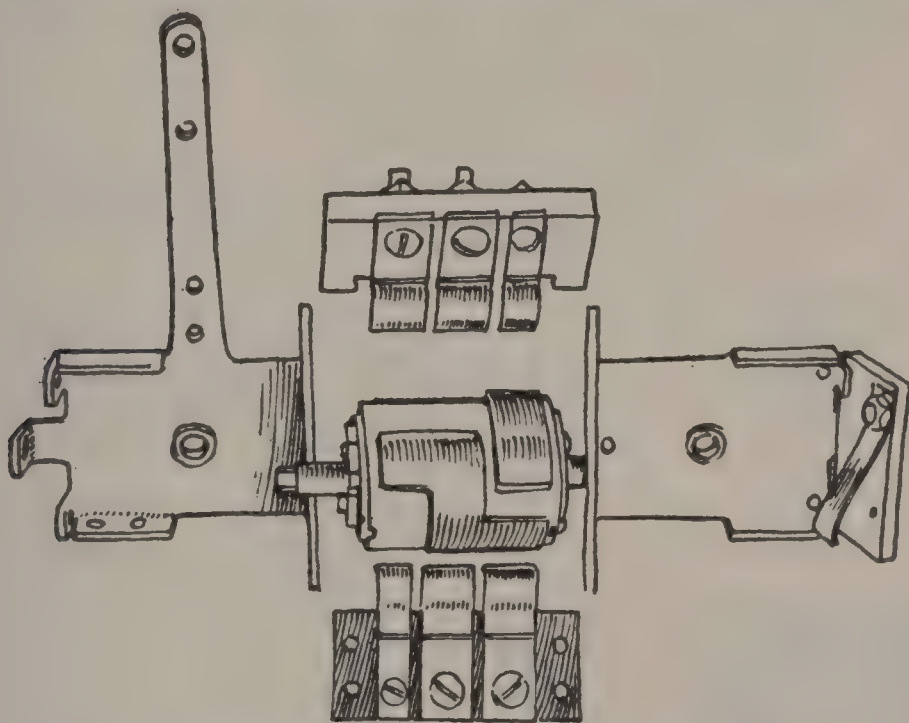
Exploded view of drum switch used by Wagner Electric Co.
